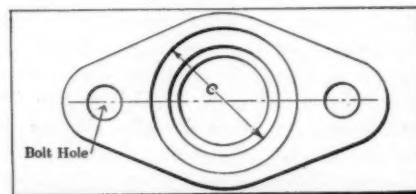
Plan view of a brazed pipe flange showing the bolt holes
